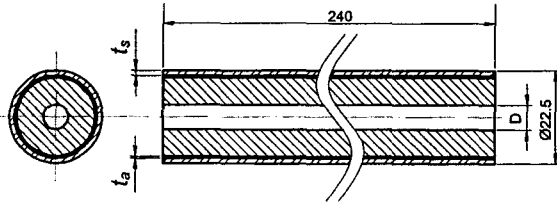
Drawing of composite boring bar specimen (Units in mm).
